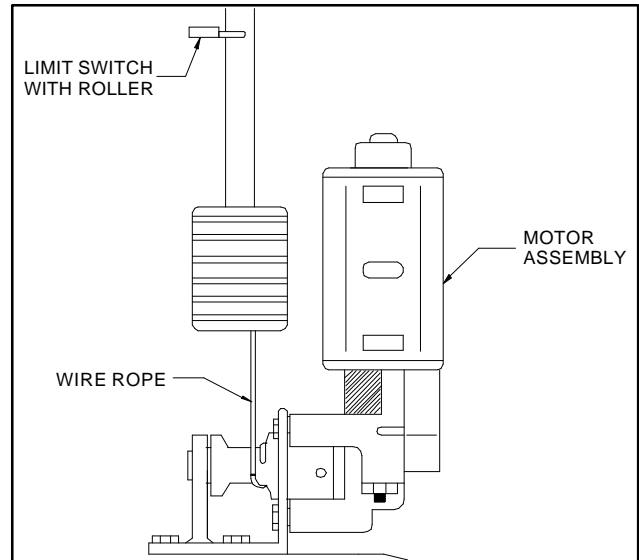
FRONT VIEW OF RIGHT-SIDE POWER PARKING BRAKE
